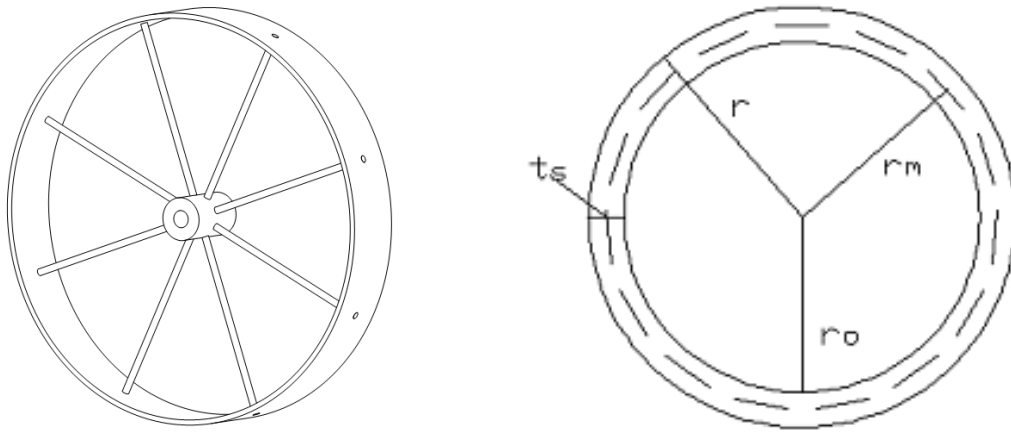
Three dimensional and cross sectional view of the wheel
